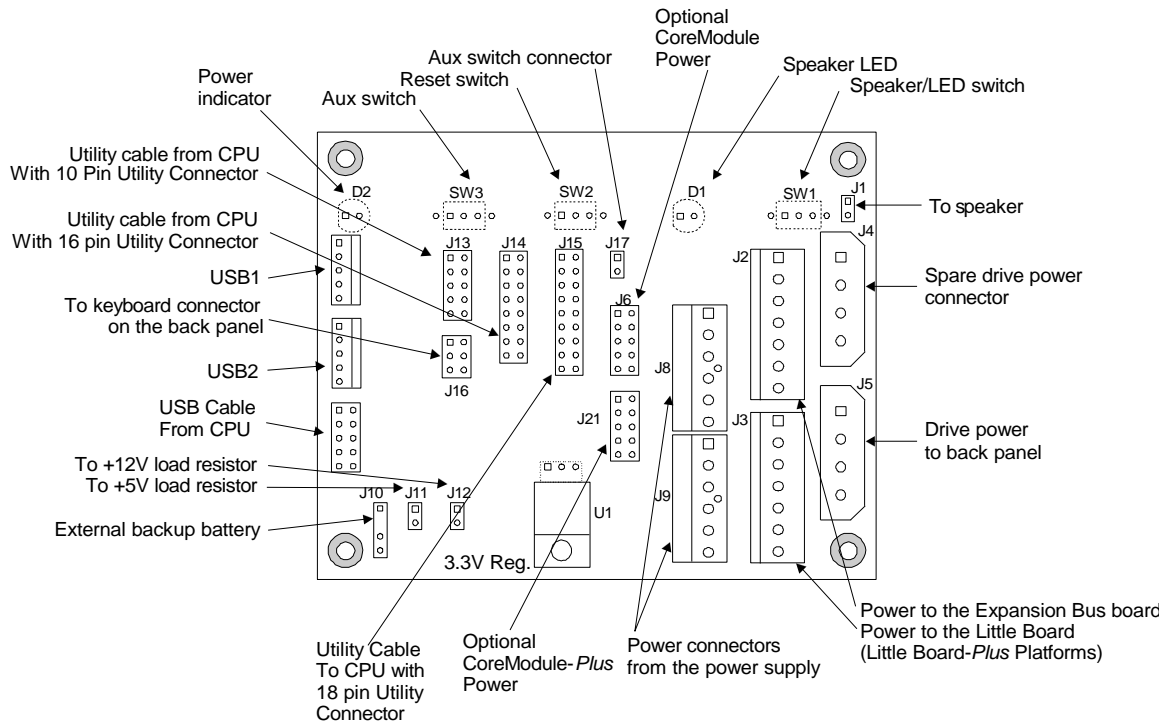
Connector and Switch Locations, Front Panel Circuit Board
